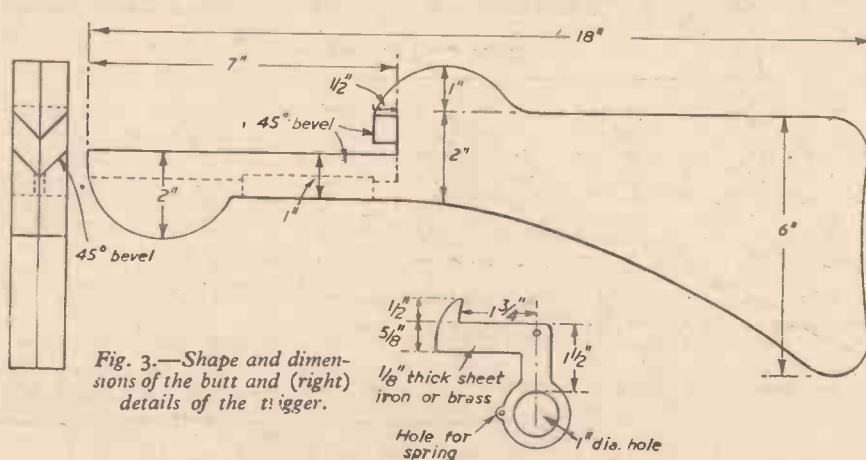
Shape and dimensions of the butt and (right) details of the trigger.
